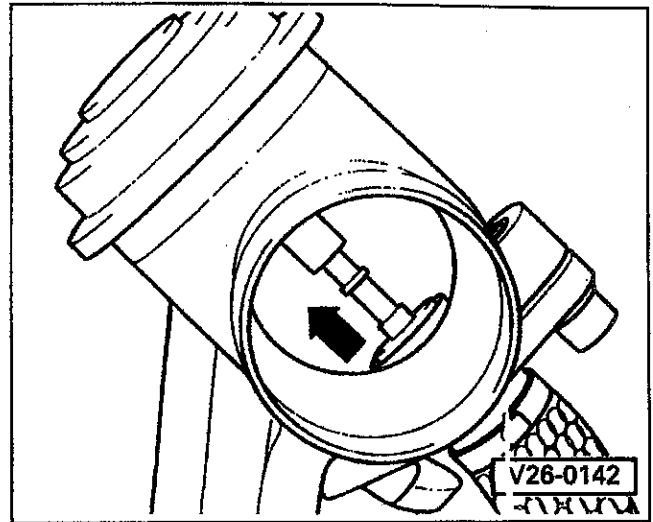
EGR valve as viewed through the open end of the intake manifold with the pipe from the intercooler disconnected. Valve must move in the direction of the arrow when vacuum from a hand operated pump is applied to the valve.
